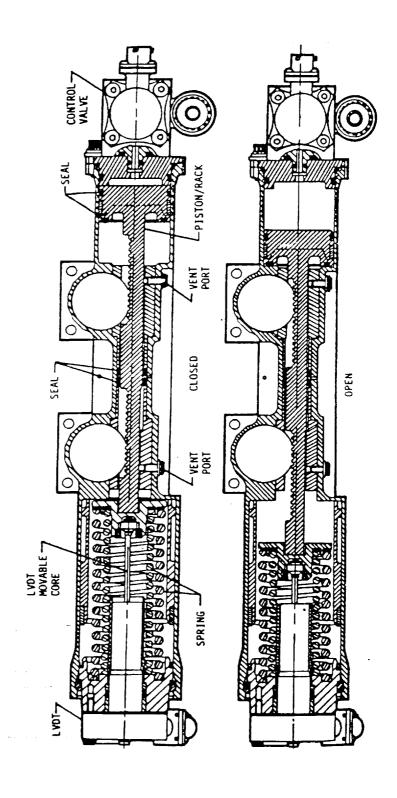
ACTUATOR ASSEMBLY CROSS SECTION
